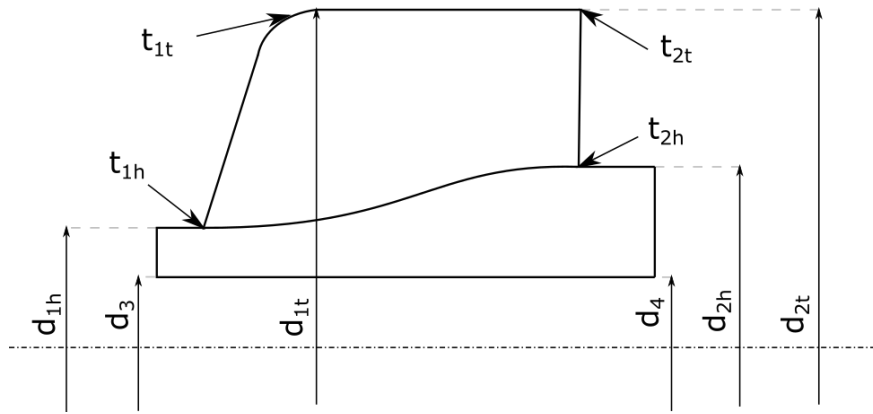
Dimensions measured to verify the accuracy of the 3D printing process.
